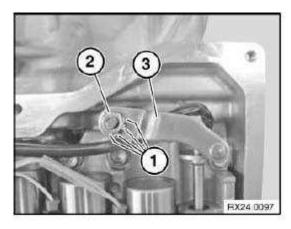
Identifying Retaining Lugs, Slacken Nut And Valve Lever Courtesy of BMW OF NORTH AMERICA, INC.
